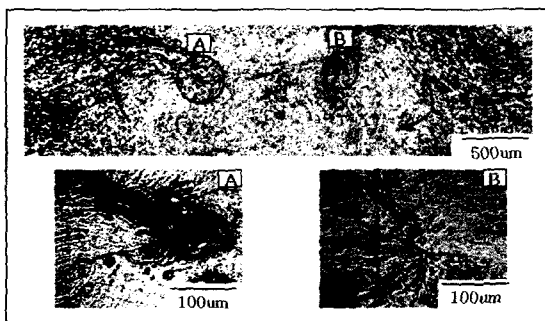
Weld defects of FSW butt joint. (1000rpm, 100mm/min)
